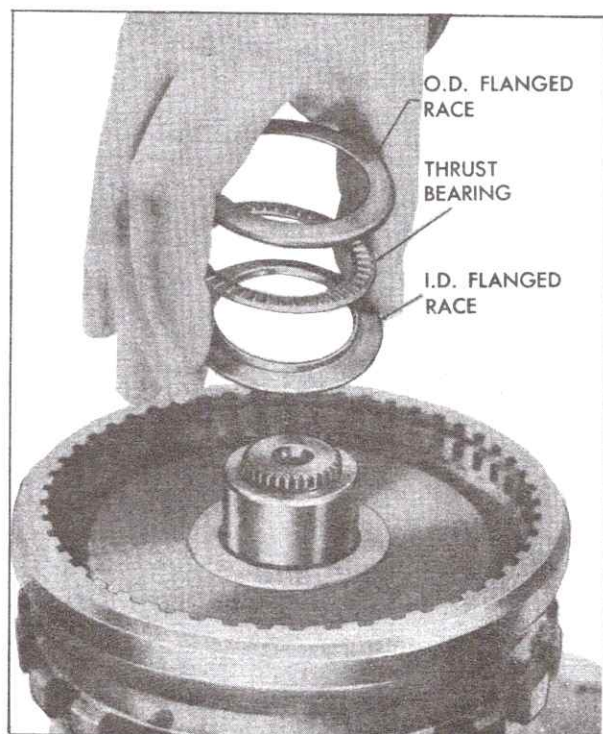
Installing Races and Thrust Bearing on Outer Face of Rear Internal Gear
